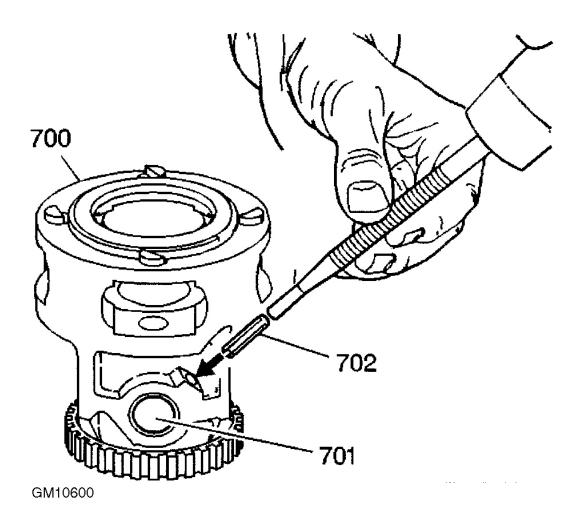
Installing Pinion Gear Shaft Pin Courtesy of GENERAL MOTORS CORP.
